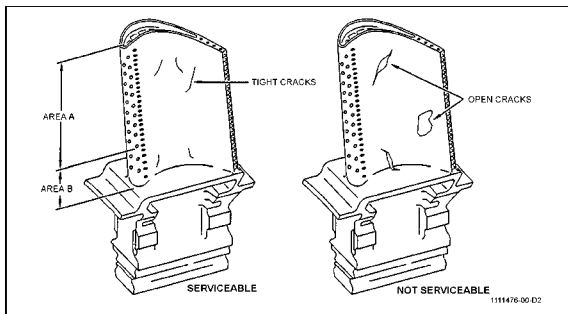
Cracks in Stage 1 Blade Concave Surface
